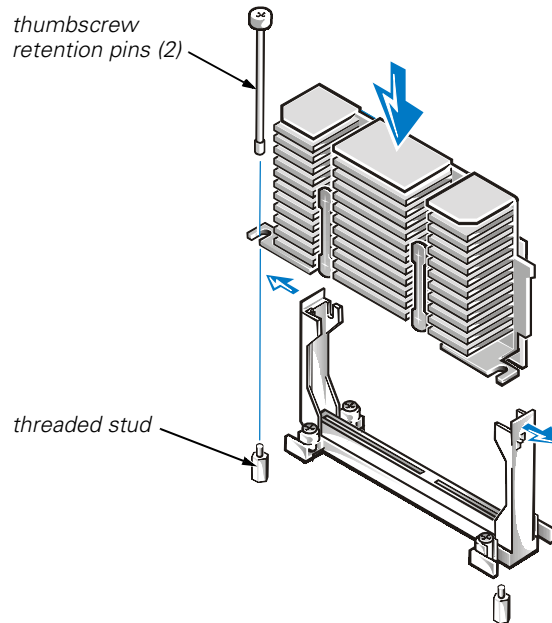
Installing an SEC Cartridge and Heat Sink Assembly
